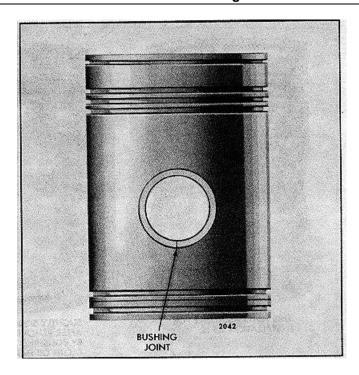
Location of Joint In Piston Pin Bushings for Piston
